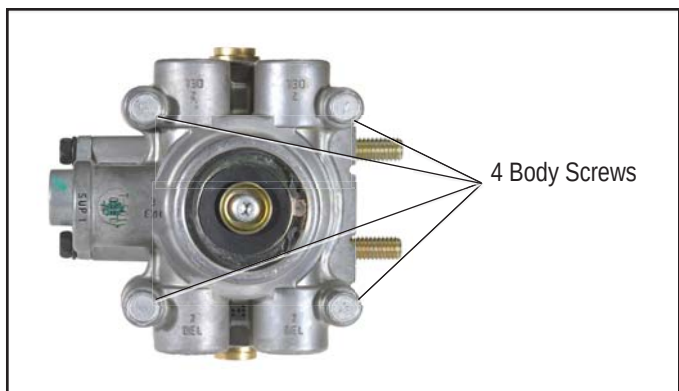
BOTTOM VIEW OF SR-7™ VALVE
